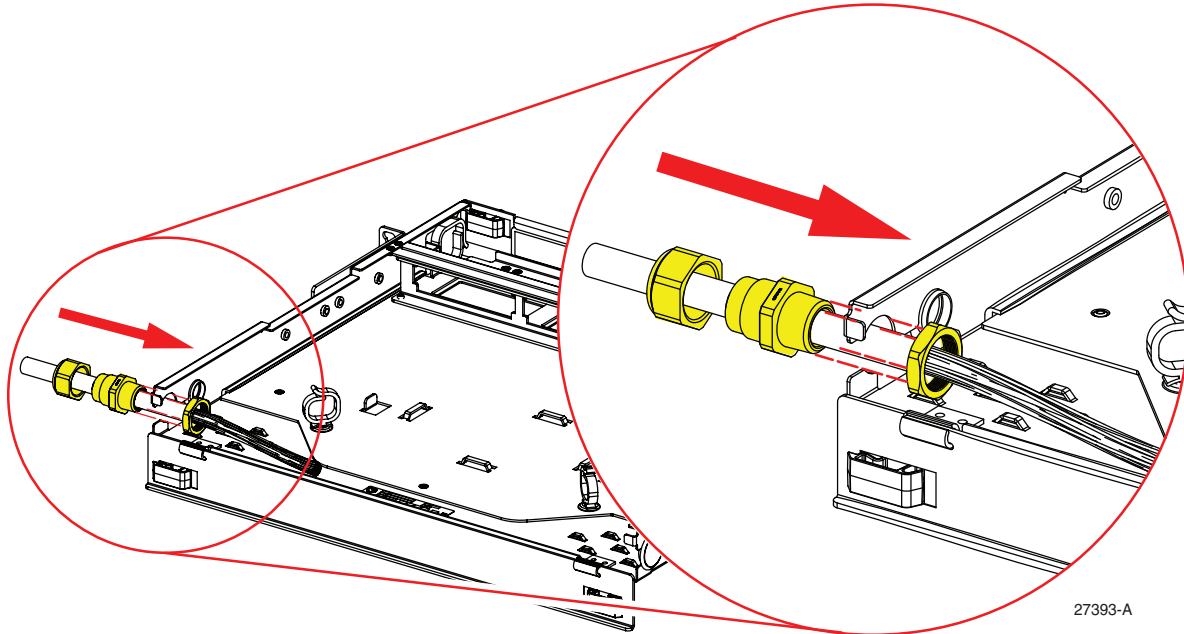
Installing Cable Gland (Standard 1/2-inch Cable Gland, Provided)
